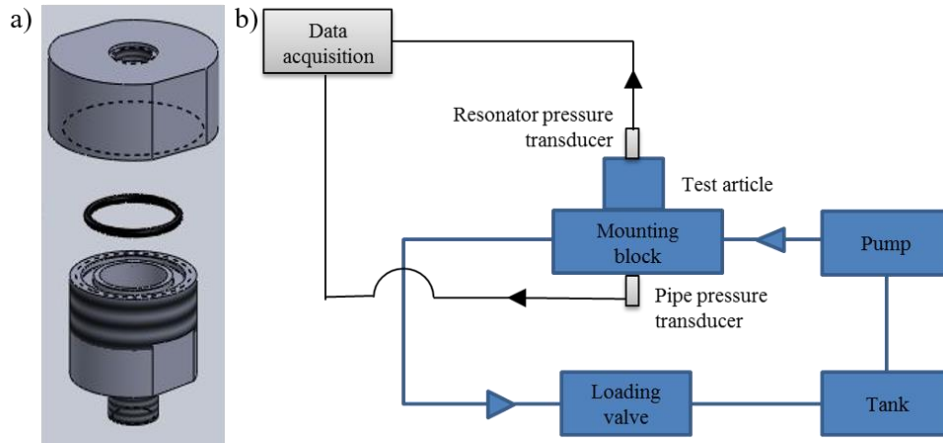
a) Test article with cap, o-ring, and housing (top to bottom) and b) testing setup schematic
